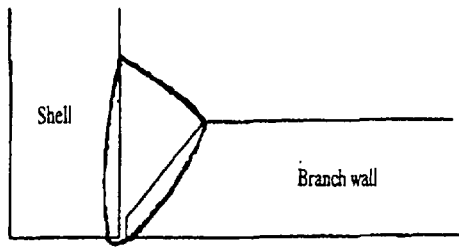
a : Fully penetrated "set on" weld.
